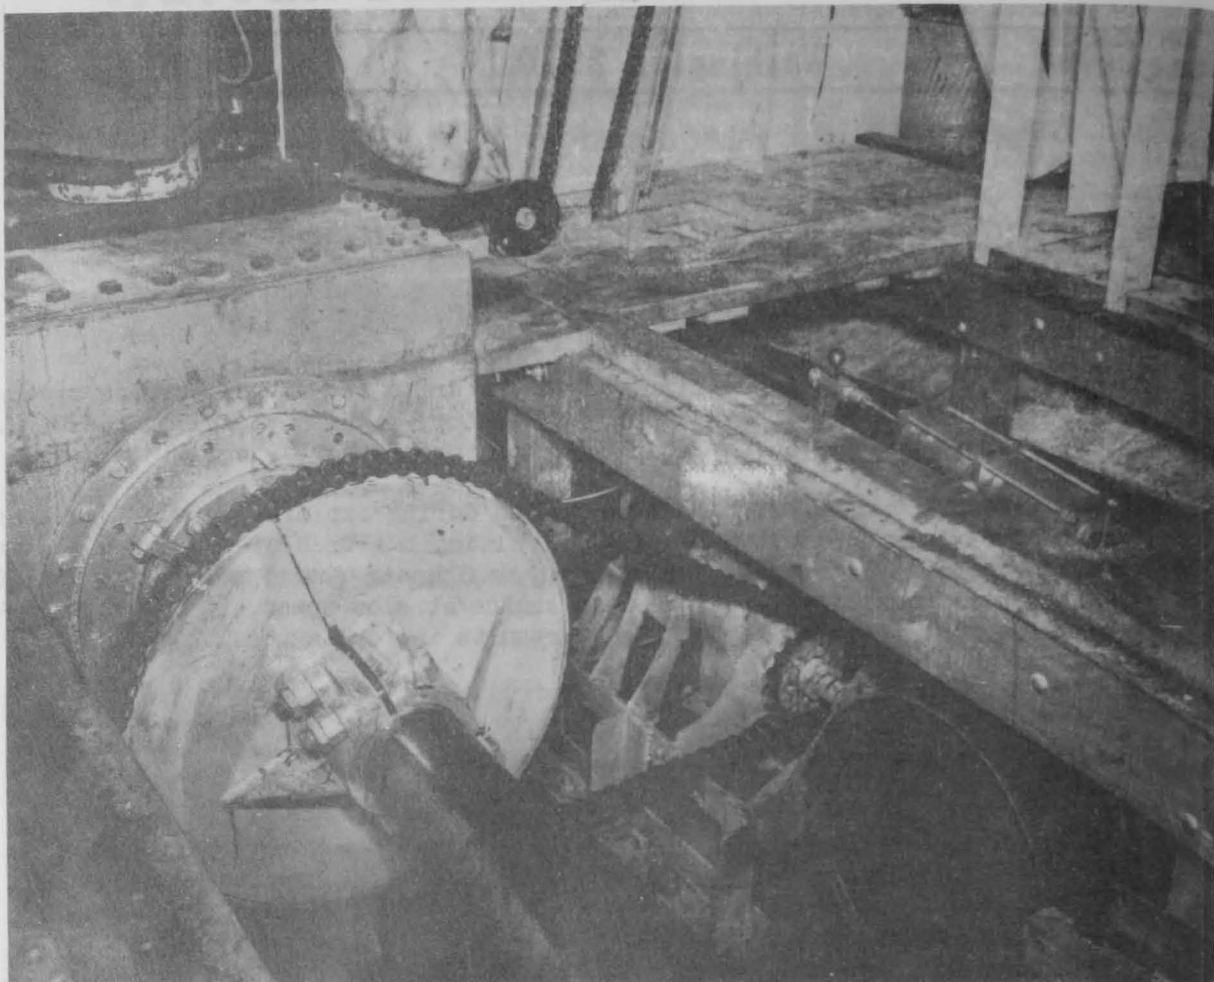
INTERMEDIATE SHAFT AND 7 TO 1 REDUCING SPROCKETS CONNECTED WITH REDUCING GEARS AND CLUTCH. AIR RAM CONTROLLING THE REDUCING CLUTCH ON THE RIGHT.
